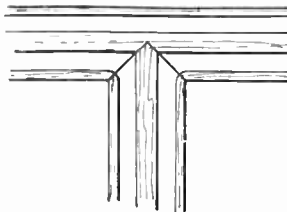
A MITRED T JOINT. Note rounded corners.
